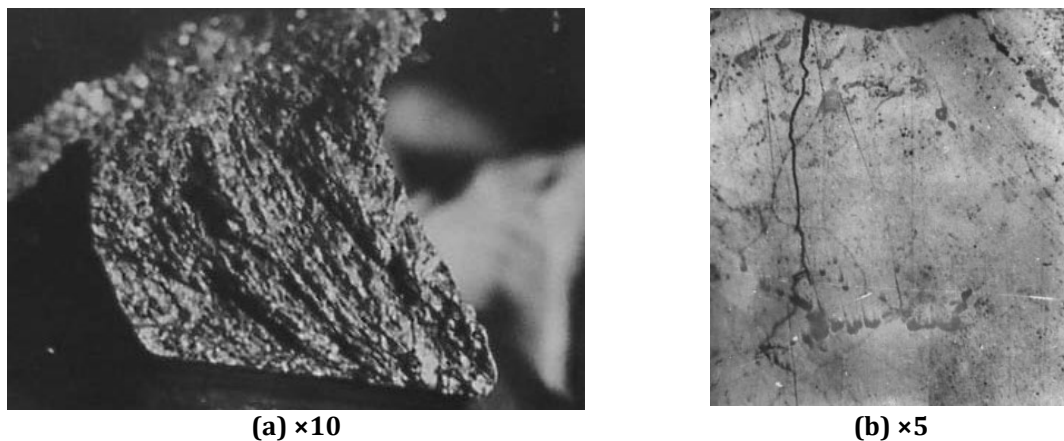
IGP fracture: a general view of the fracture (a) and transcrystalline fracture development
